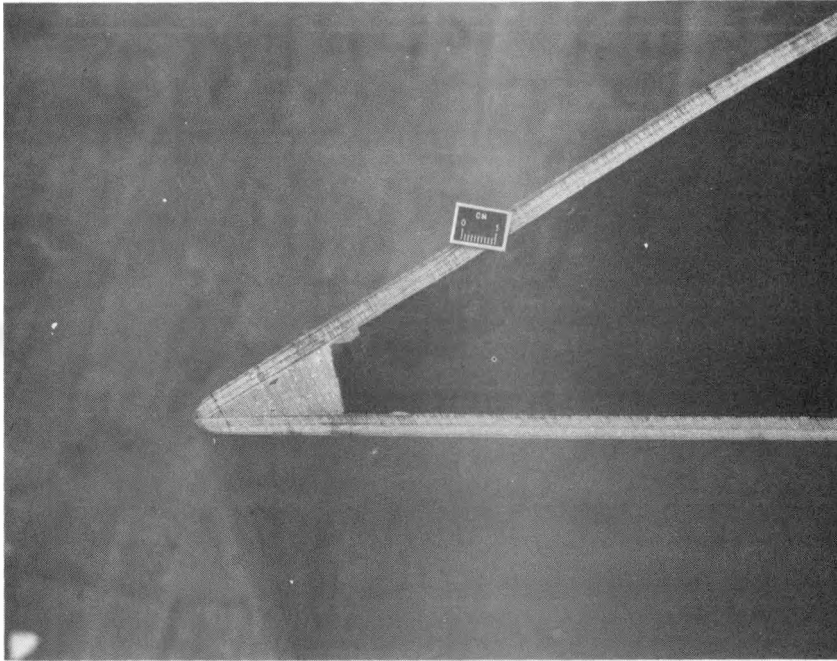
Trailing edge bond of sectioned 20 foot blade test specimen.
